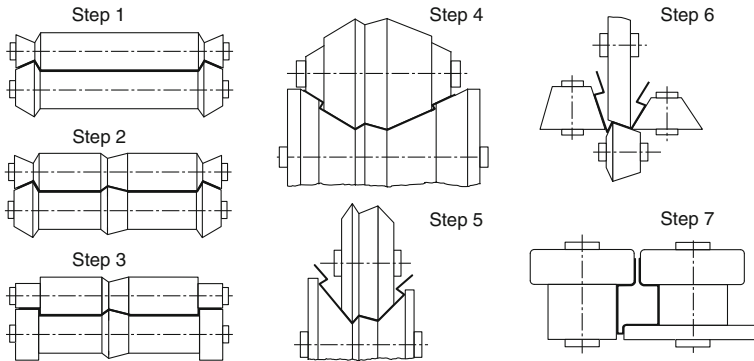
Manufacture of a door frame profile (roll forming) [OEHL63]
